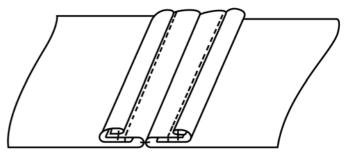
Hong Kong Seam Finish from Back Side of Fabric
